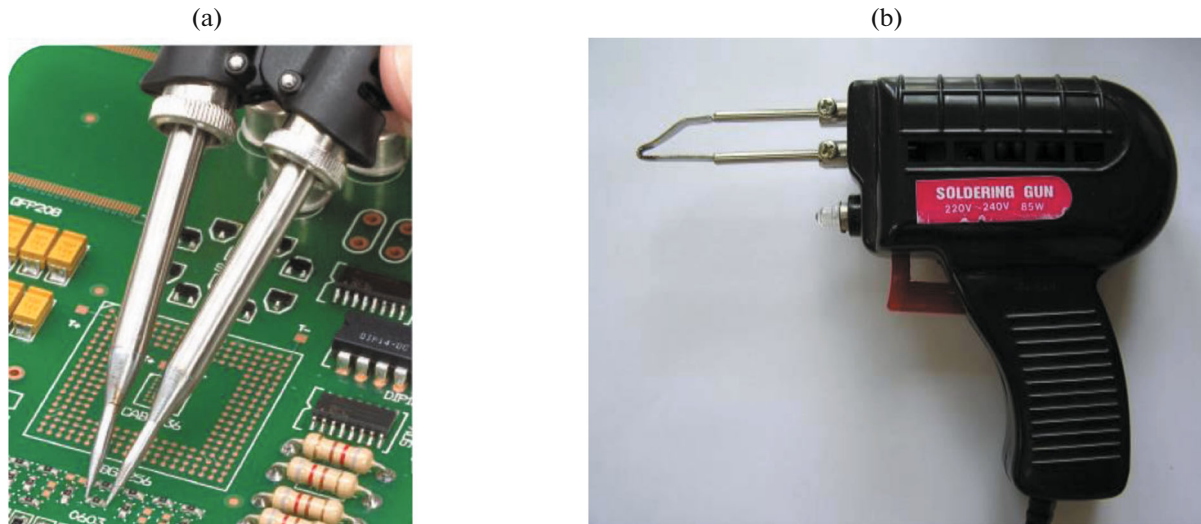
(a) Group soldering iron and (b) soldering gun.
